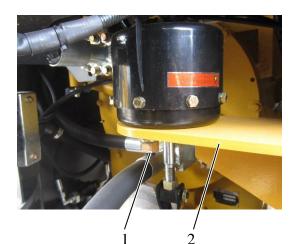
1 Parking brake fixing bolt 2 Support
